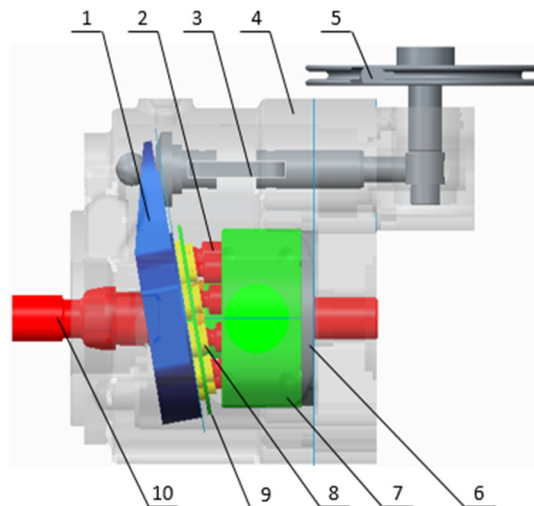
The swash-plate axial piston pump: (1) Swash plate; (2) Pistons; (3) Connecting rod; (4) Shell; (5) Variable displacement mechanism; (6) Valve plate; (7) Cylinder; (8) Slipper; (9) Slipper retainer; (10) Spindle.
